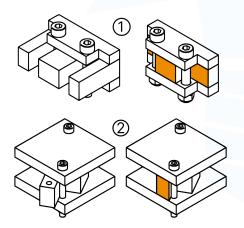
The orange surface is wrought with an angle grinder, to fit inside the generator.
